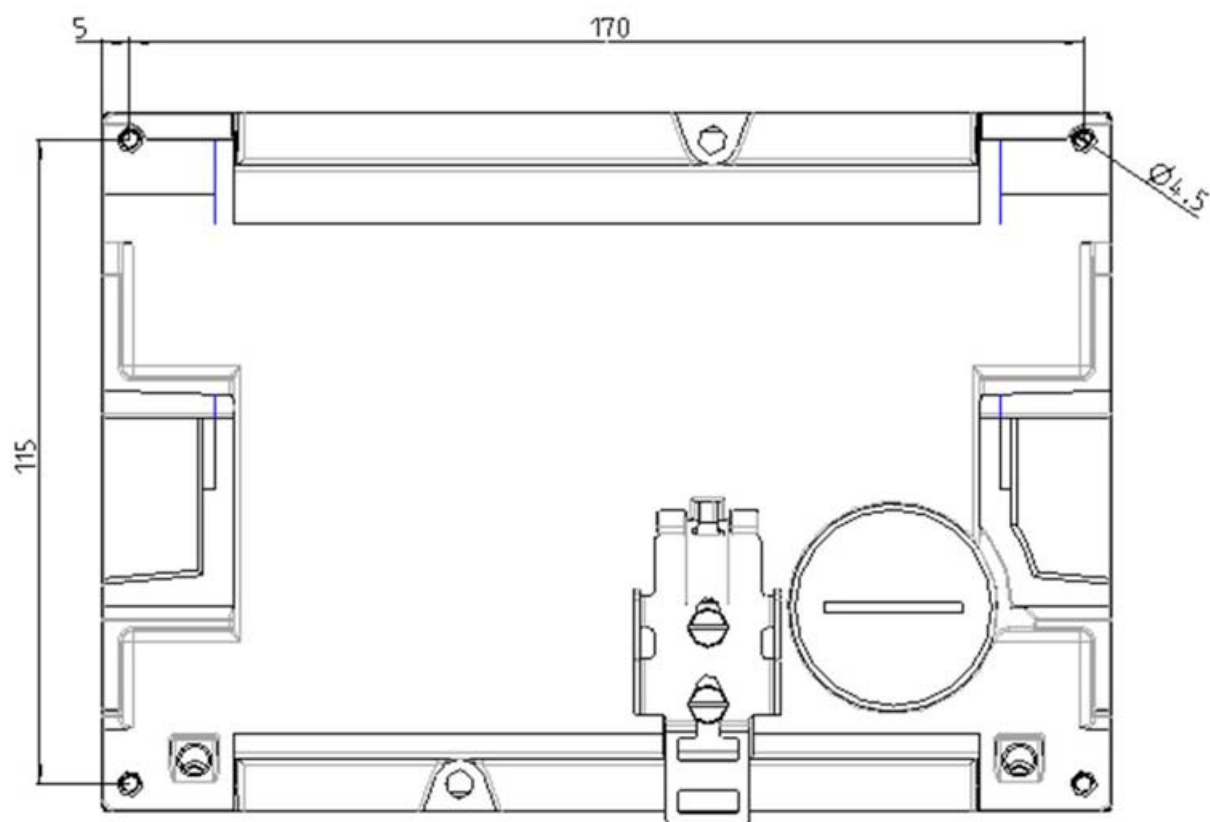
Large design dimension drawing (IE Switch X-320)
